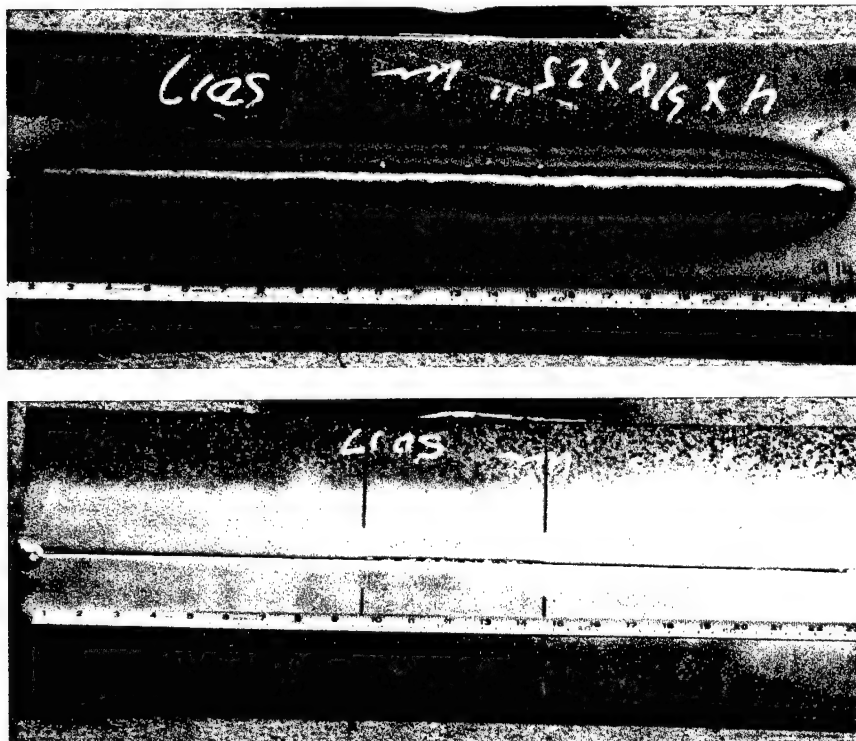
Top and bottom sides of butt joint weld with variable gap performed with automatic control.
